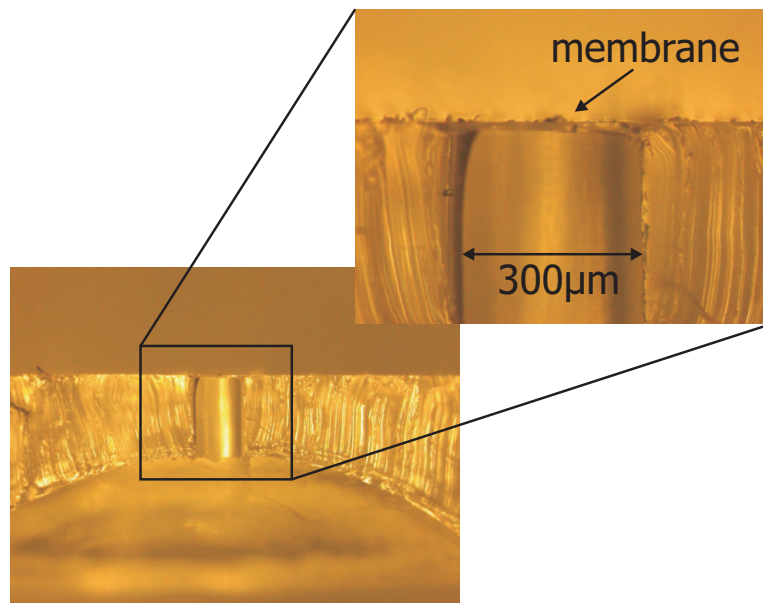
By using a flat-ended pin as casting core, a thin membrane could be fabricated using a single cast step.
